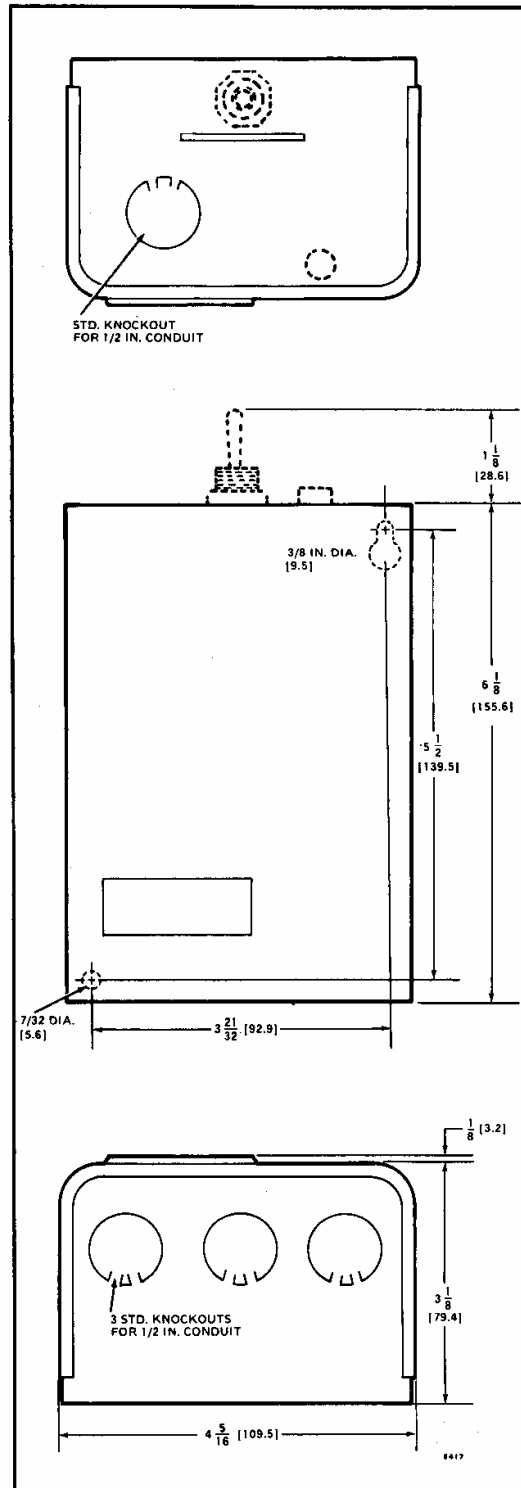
R7412 MOUNTING DIMENSIONS IN INCHES [MILLIMETRES IN BRACKETS].
